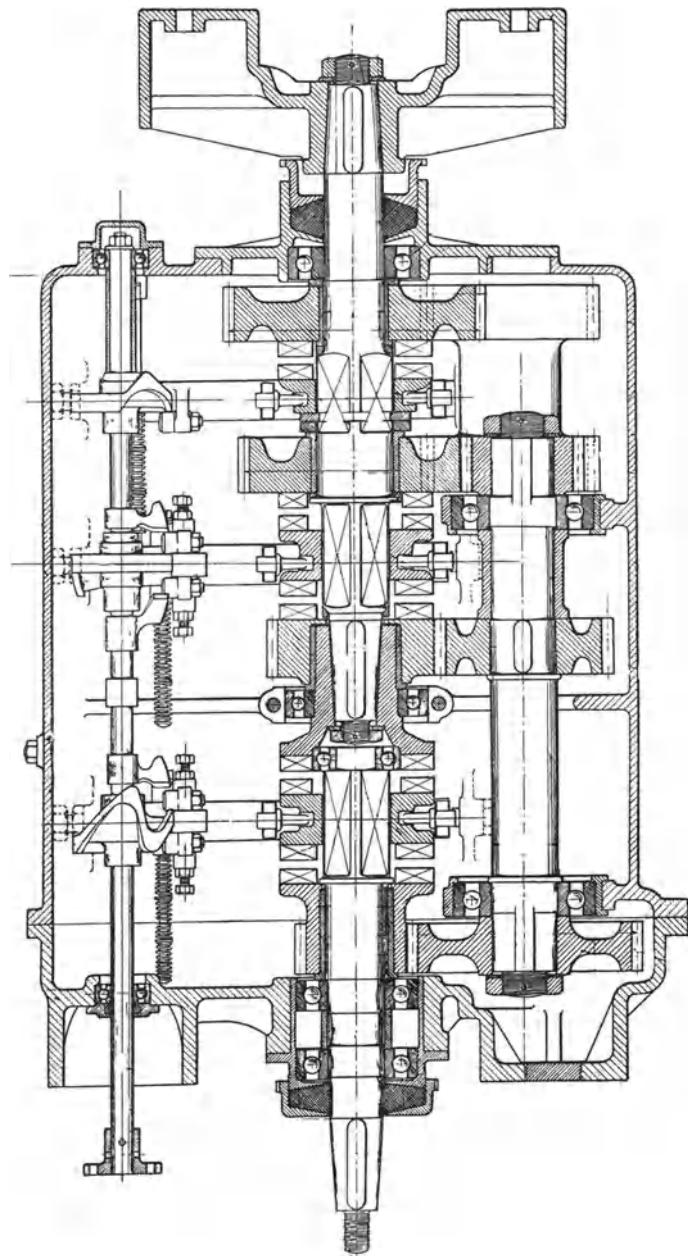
Dog clutch gearbox of a truck built in the 910s. Sliding trains are now reduced to small front tooth gears working as clutches (redrawn from Genta and Morello 2009)
